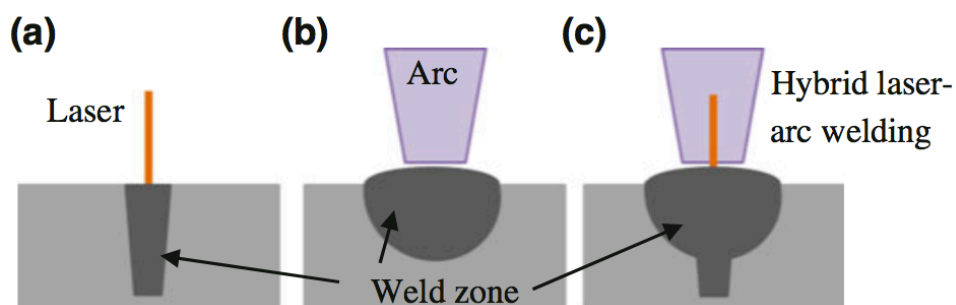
(a) Weld bead of laser welding, (b) Weld bead of arc welding, and (c) Weld bead of hybrid laser-arc welding (19, p. 131)
